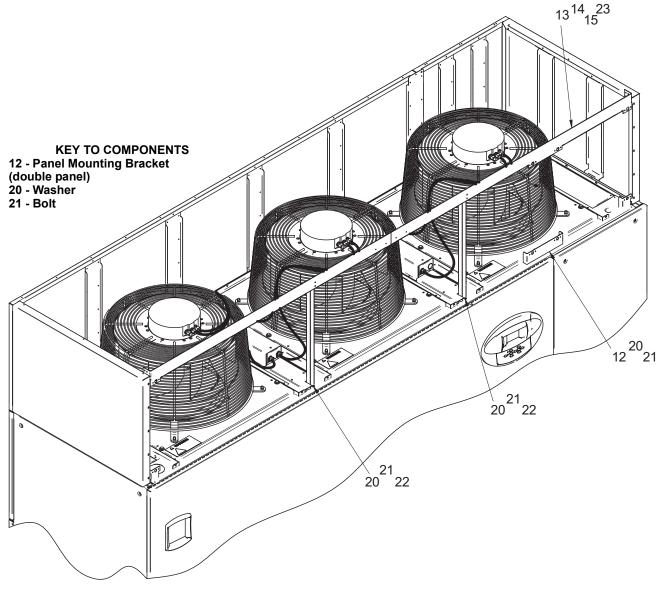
Front frame members for non-grilled and grilled rear-discharge plenum
